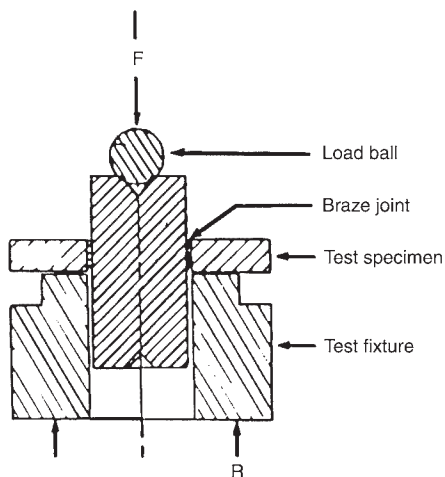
Schematic illustration of cylinder/ring push specimen and test fixture for shear testing of brazed joints. Source: Grant 1979
